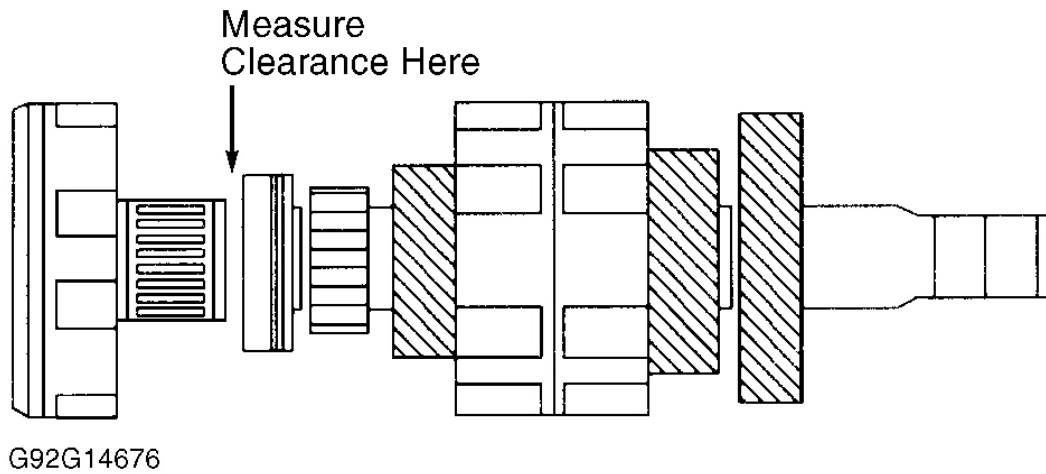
Checking 1st Gear-To-Thrust Washer Clearance
